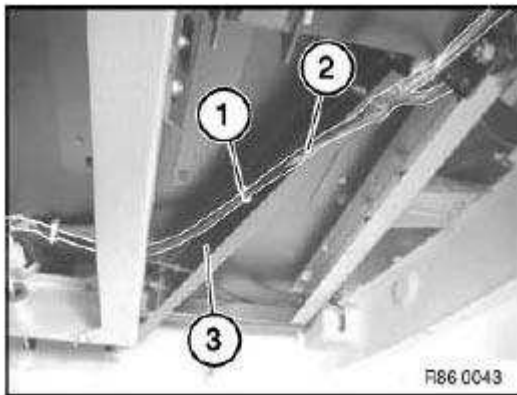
Identifying Cable Holder, Wiring Harness & Drawbar Member
